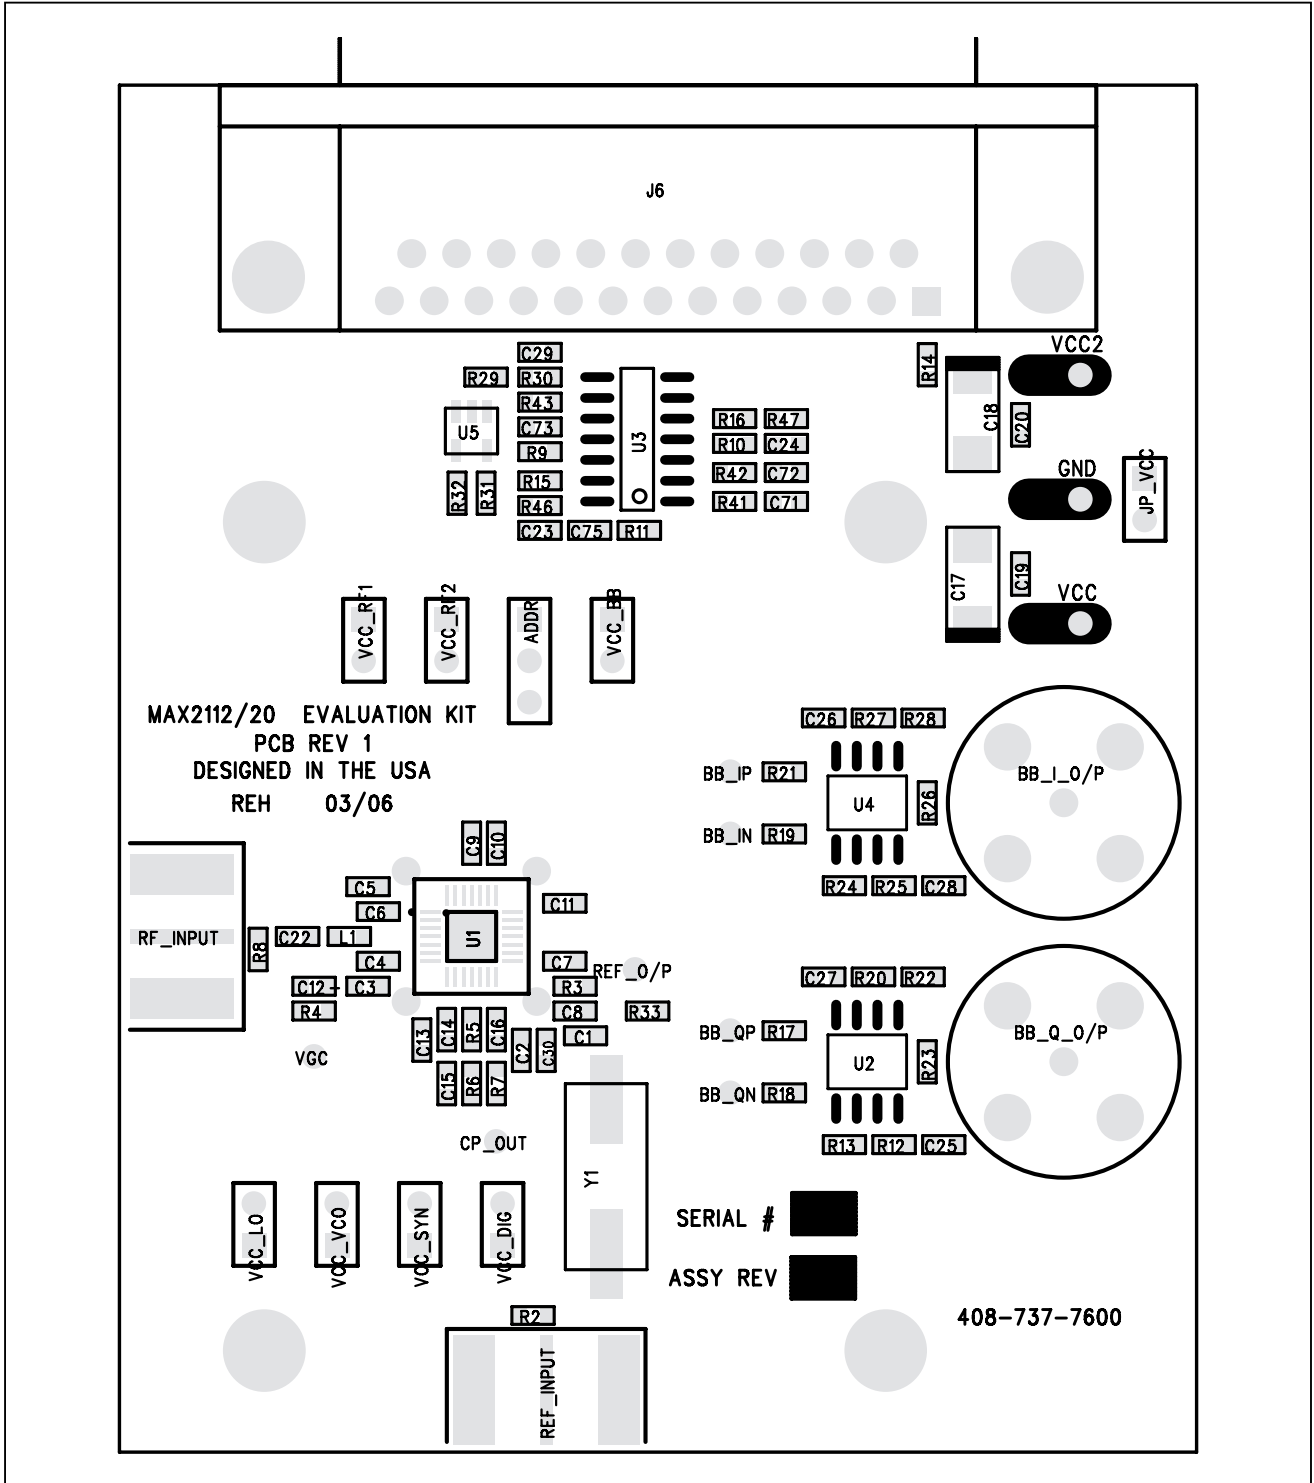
MAX2117 EV Kit PCB Layout—Component Placement Guide
